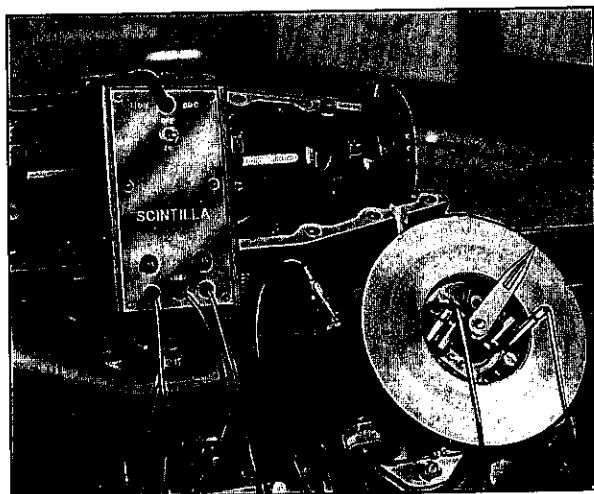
Two Methods of Checking Exhaust Breaker Point Opening.
